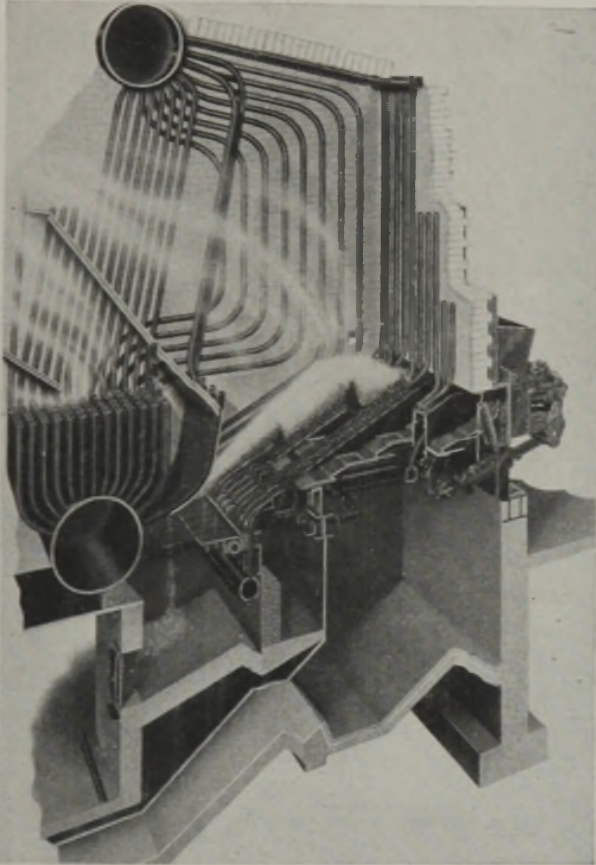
Cross section of bent-tube boiler and water-cooled Taylor stoker.
